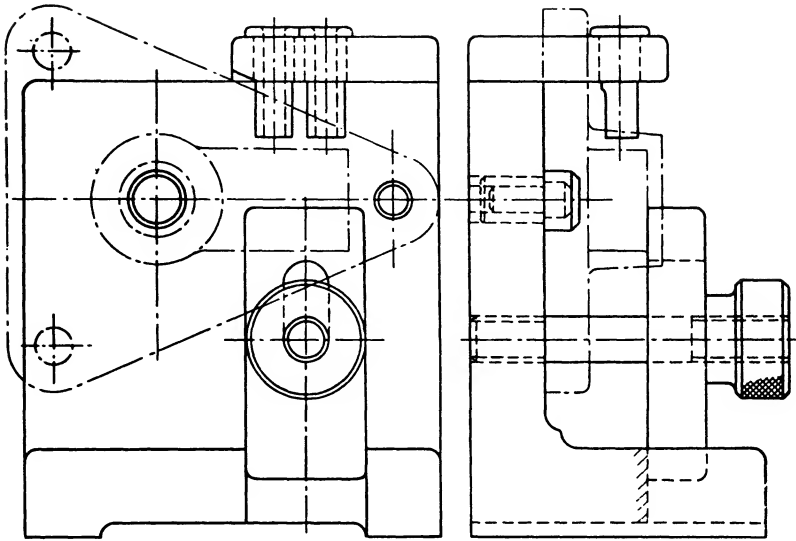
FOURTH OPERATION JIG (J 4) FOR DRILLING $\frac{3}{16}$ IN. DIAMETER HOLES
